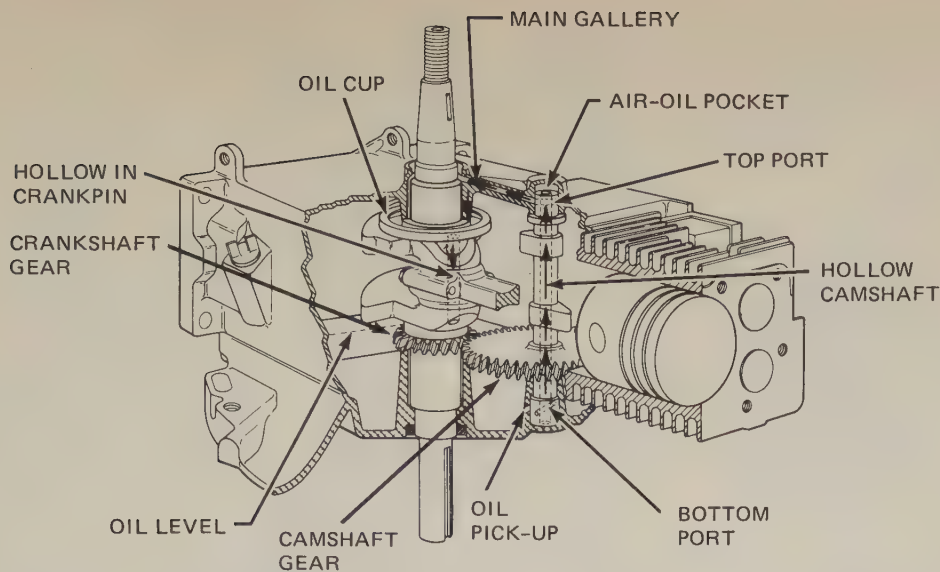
Gearing arrangement in a small four-cycle horizontal engine for driving the camshaft from the crankshaft. This illustration also shows the flow of lubricating oil to the camshaft, crankshaft, and connecting-rod bearings. (Kohler Company)
